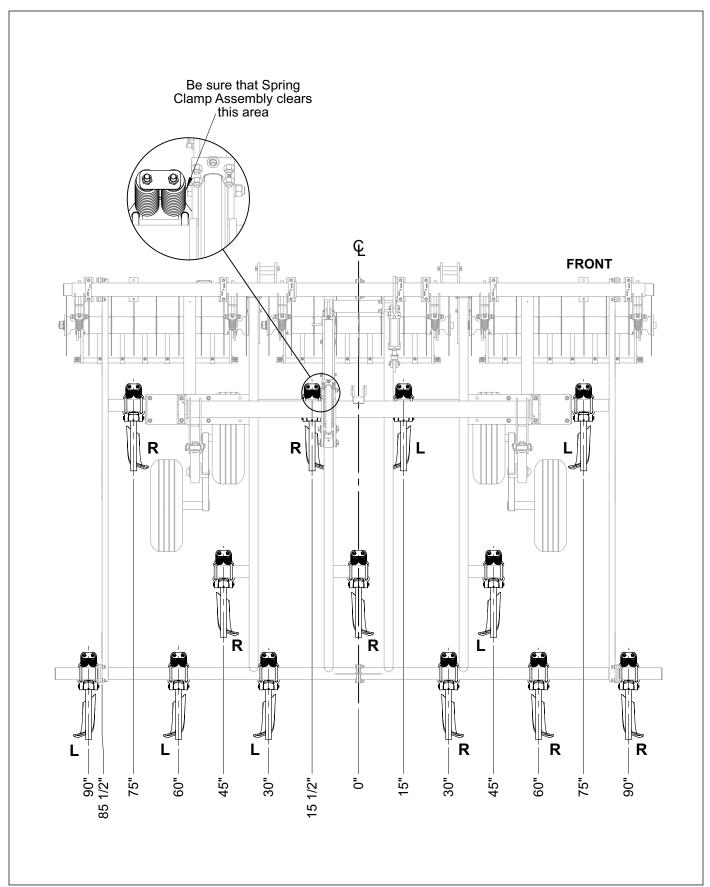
13 Shank, Tandem Wheel Machine, Top View
